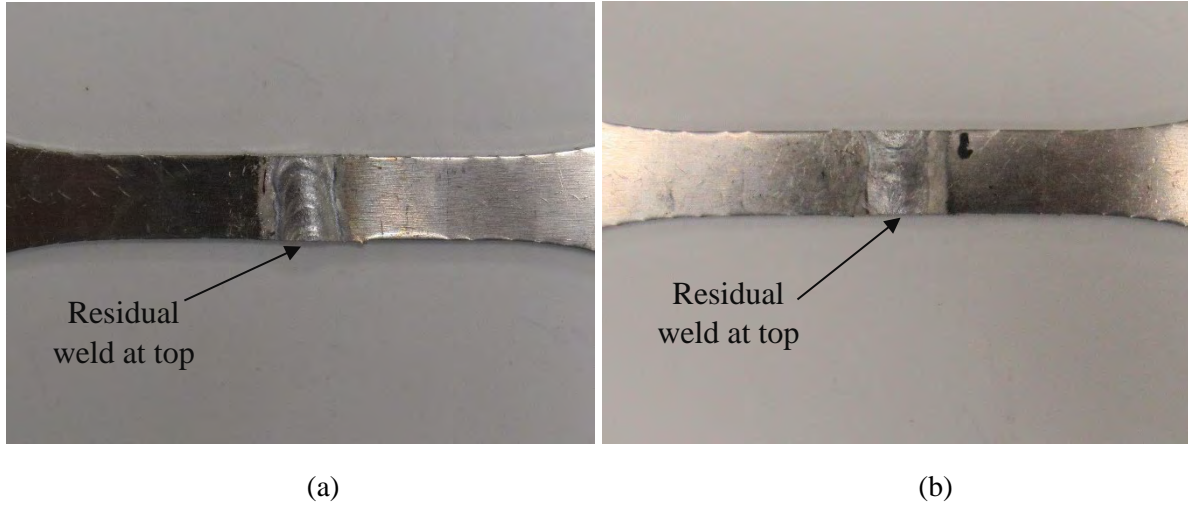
Top view of welded tensile specimens from combination W4: (a) 1st specimen and (b) 2nd specimen
